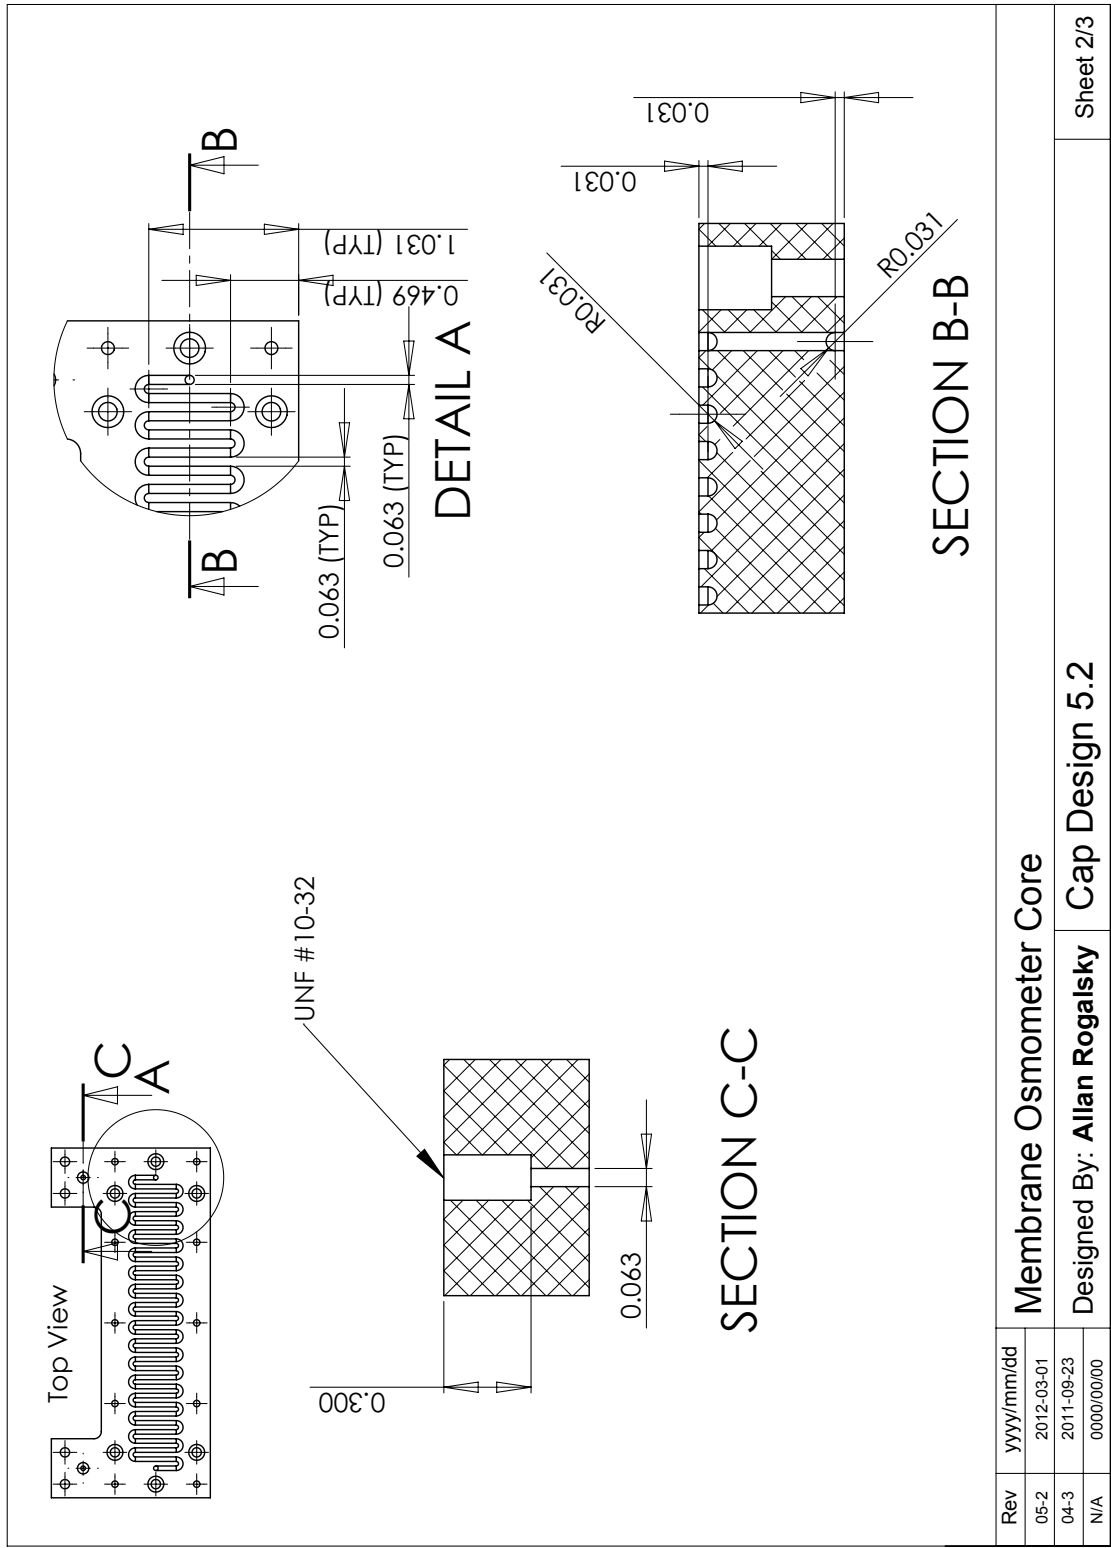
Osmometer Top Level 5.2 / Core Assembly 5.2 / Cap 5.2 / Sheet 2
